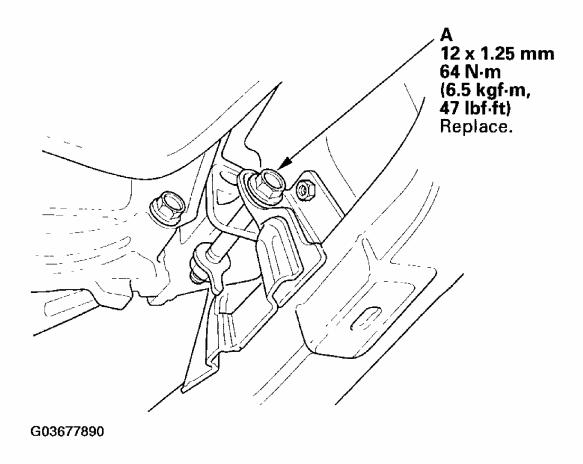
Identifying Tightening Torque Of Front Engine Mount Bracket Mounting Bolt
